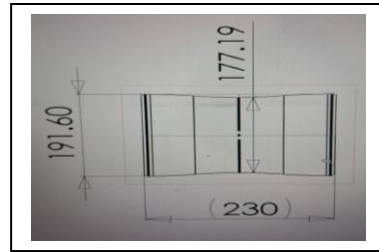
Dimensional Sketch of Concave Roller (in mm).
